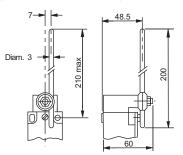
Wobble-type with spring with tip (ABM, ABP models)
